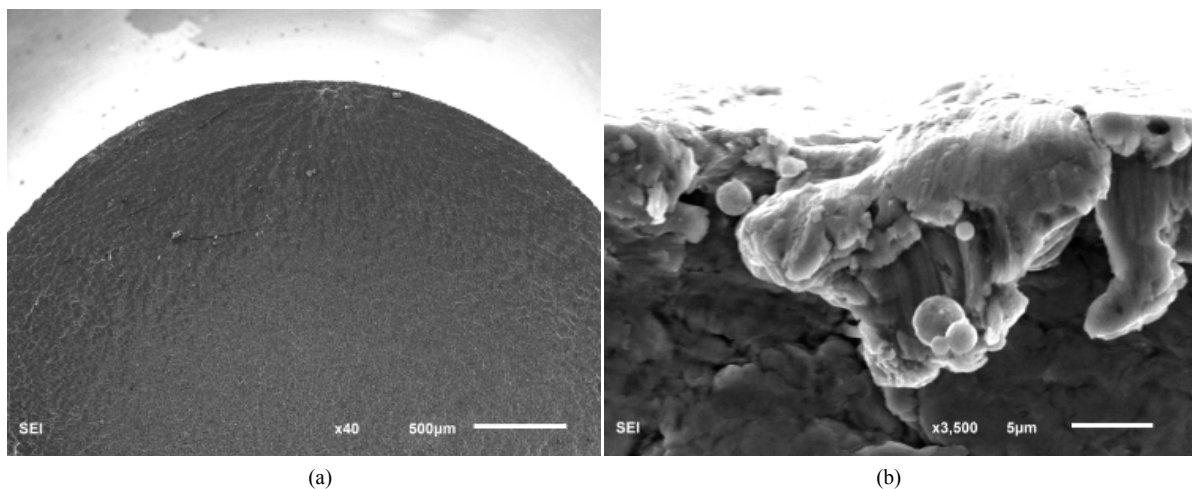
Fracture SEM of Rotary Bending Corrosion Fatigue Specimens; (a) Panorama, (b) Crack Source Area Morphology
